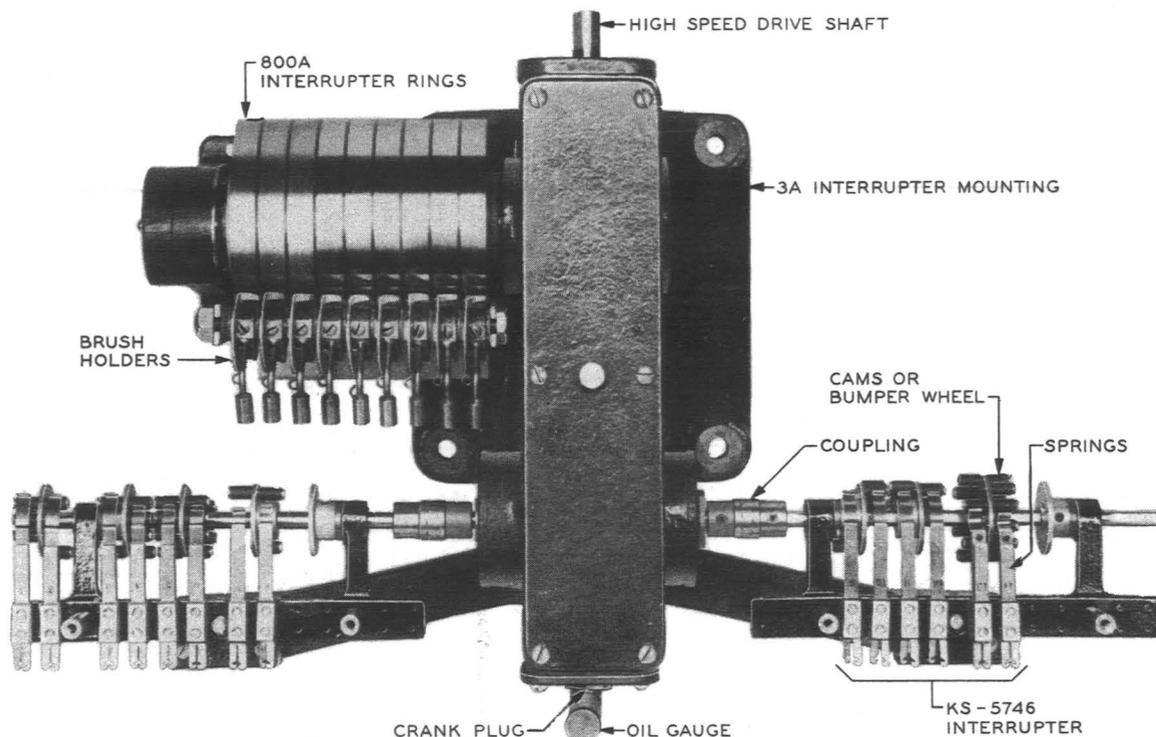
3A Interrupter Mounting With 800A and KS-5746 Interrupters - Top View
